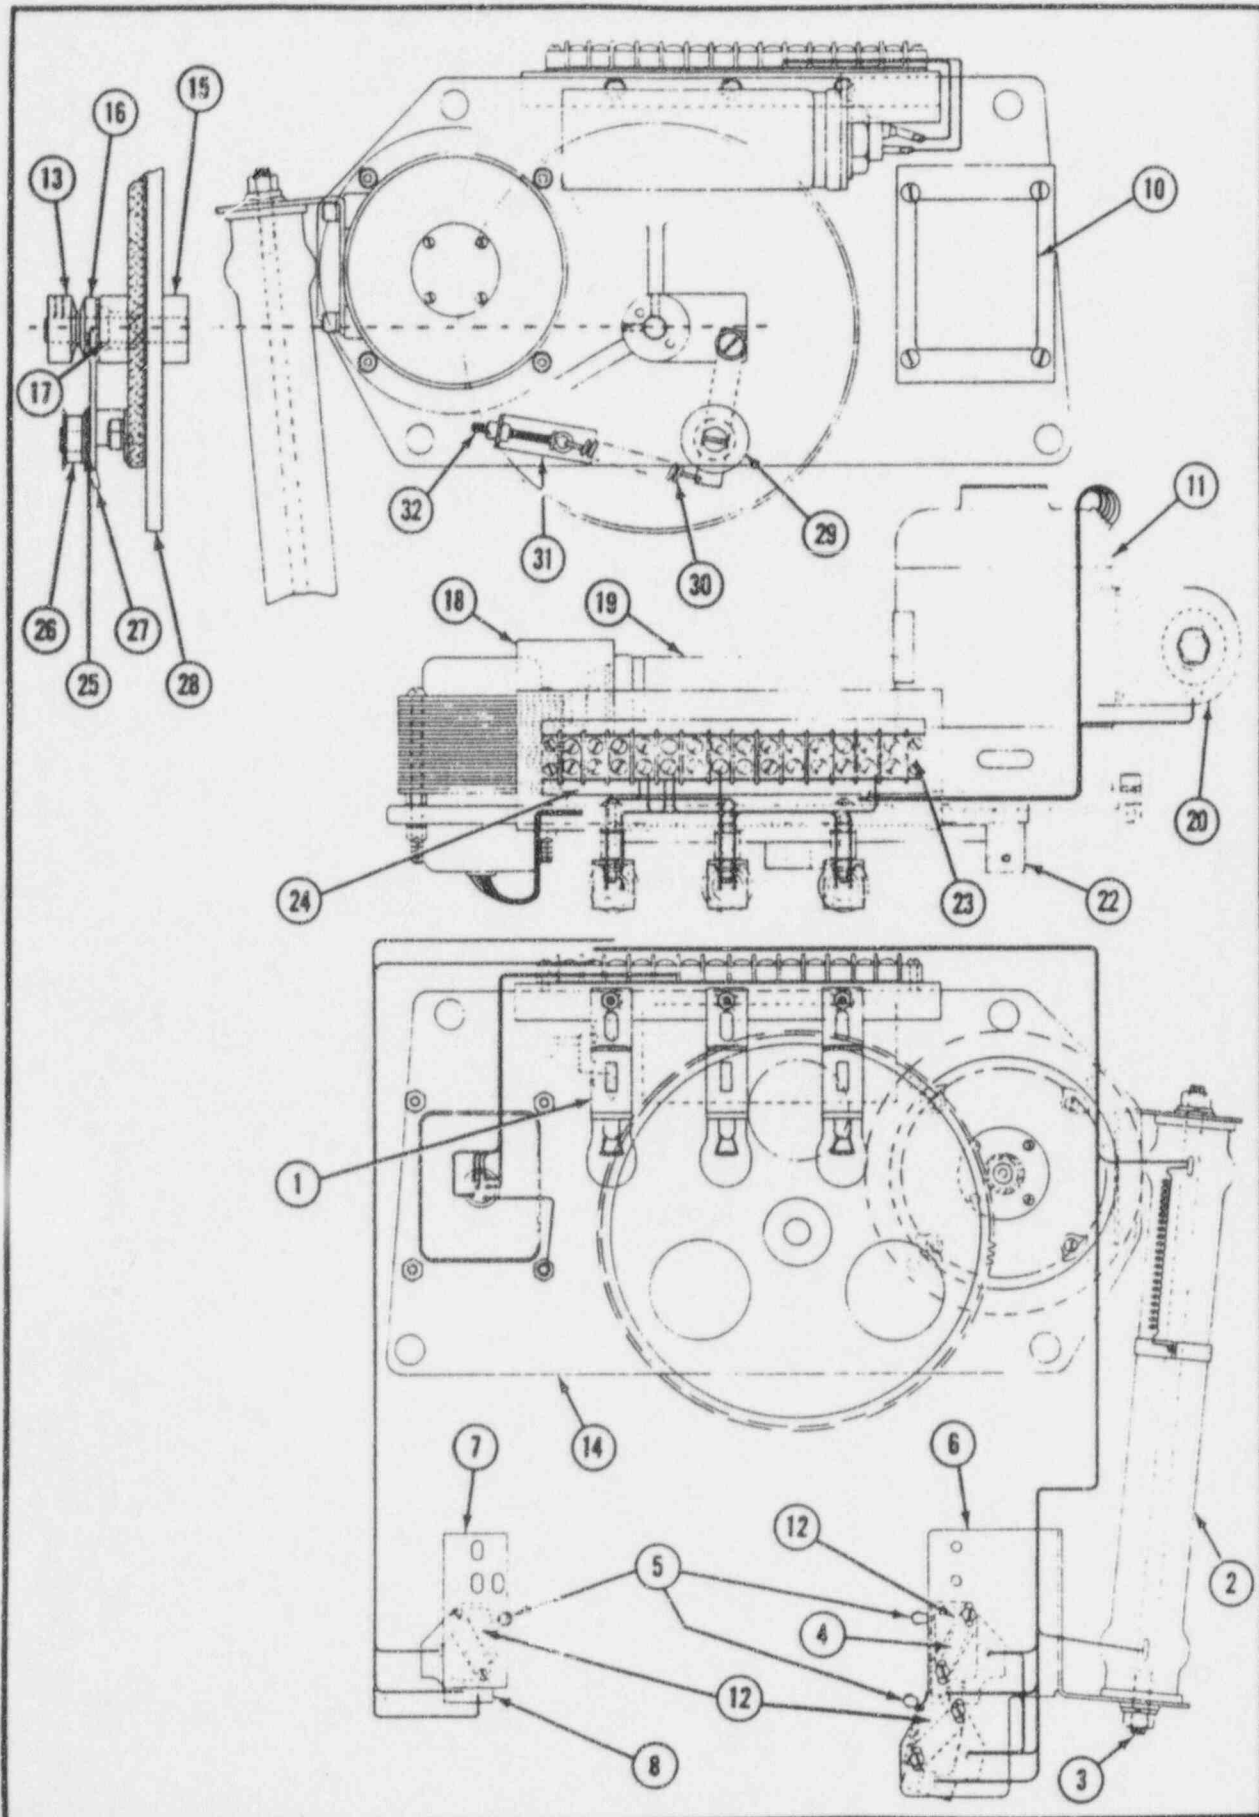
SHUTTER DRIVE MOTOR ASSEMBLY
